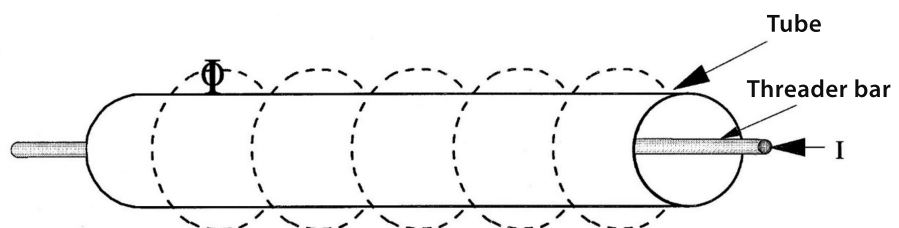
A hollow component on a central conductor: the threader bar technique
